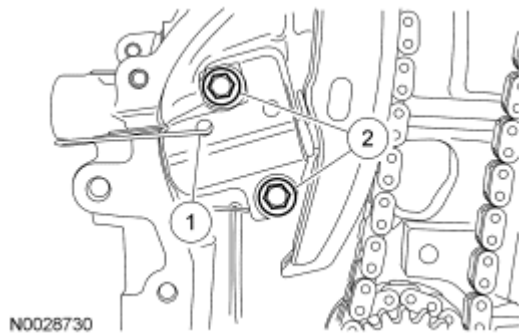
Identifying Paper Clip Into Hole And Bolts
